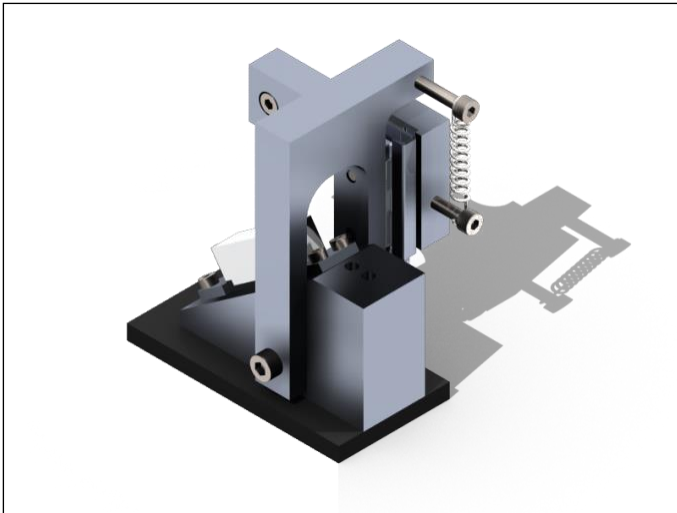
Probe holder for butt fusion joints, with the probe/wedge assembly attached.
